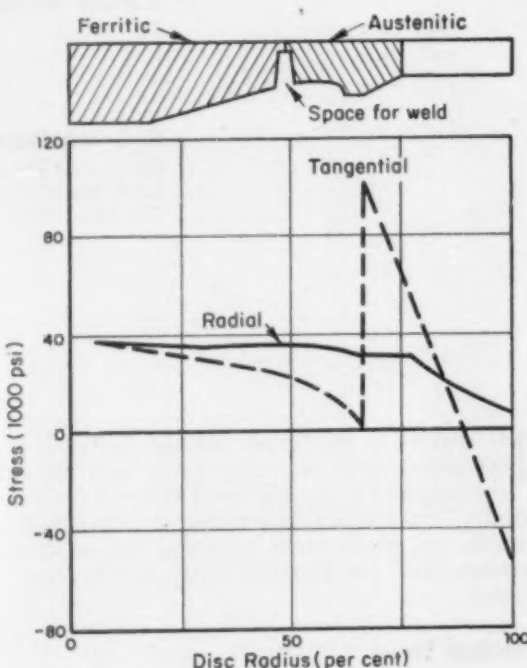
Cross section of turbine wheel made up of two parts welded together. The rim region is generally preheated before welding. As it cools, beneficial residual stresses are set up. Without this treatment, stresses would be 60,000 psi at the center, and 100,000 at the rim.
